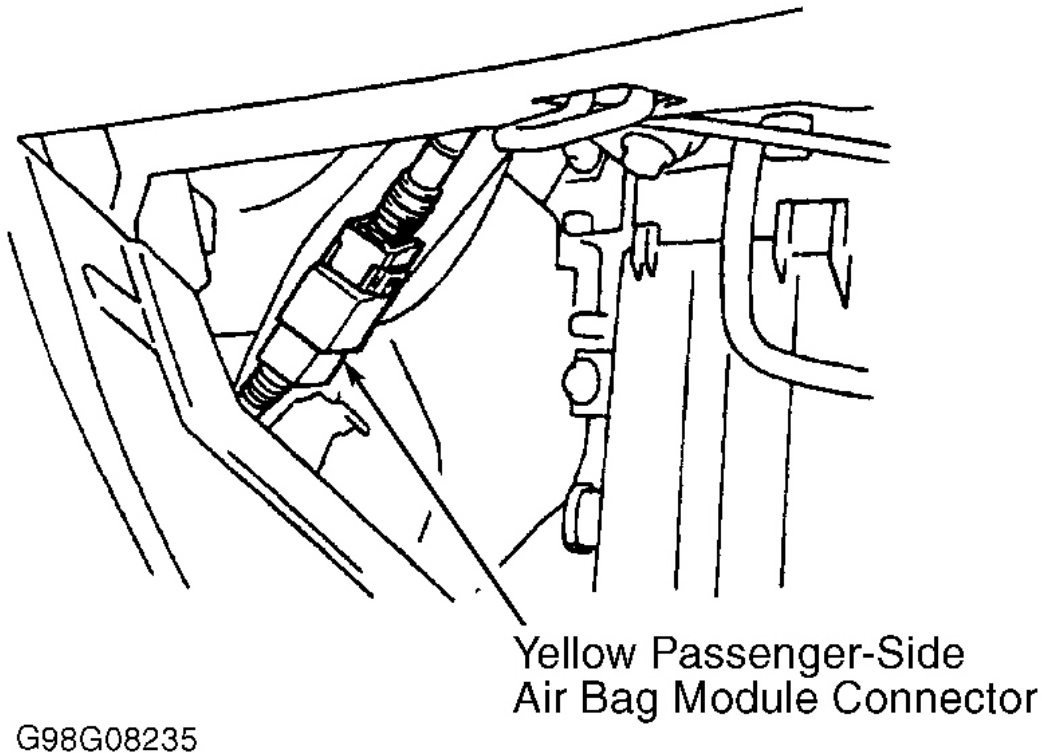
Disconnecting Passenger-Side Air Bag Connector
